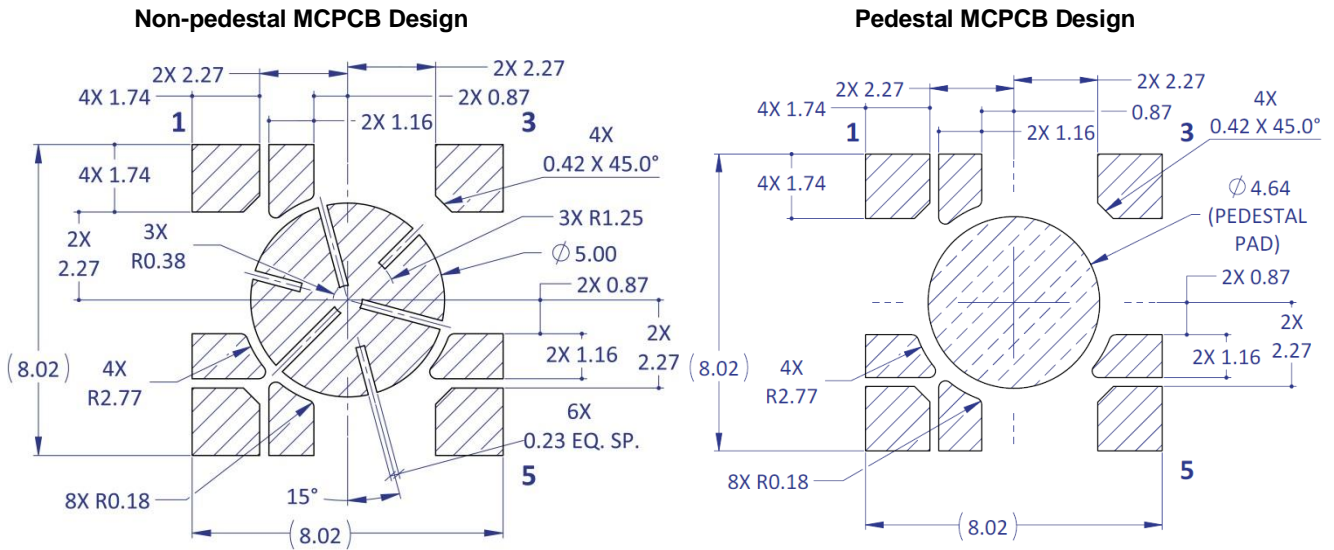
Recommended solder pad layout for anode, cathode, and thermal pad for non-pedestal and pedestal design
